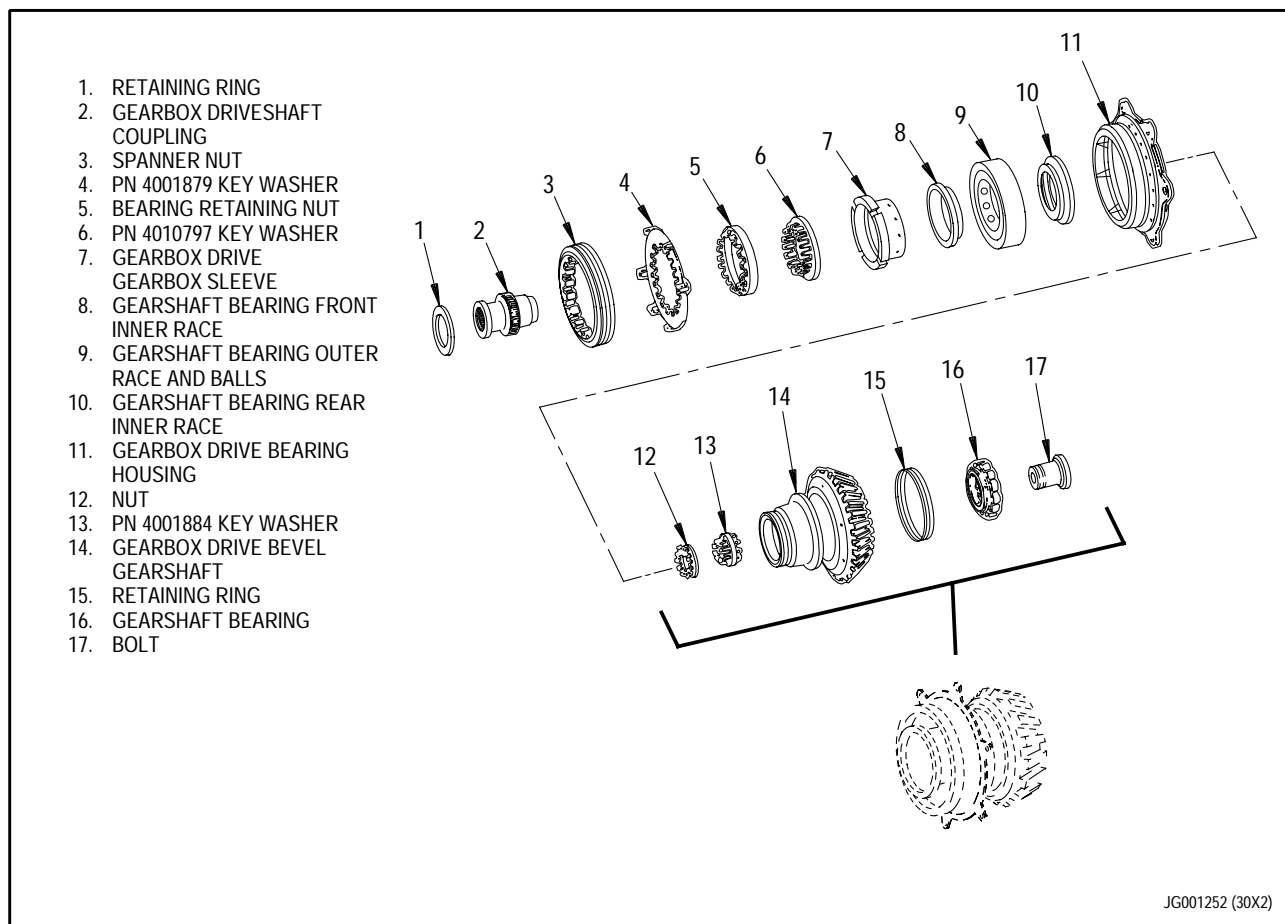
Gearbox Drive Bevel Gearshaft - Assembly
